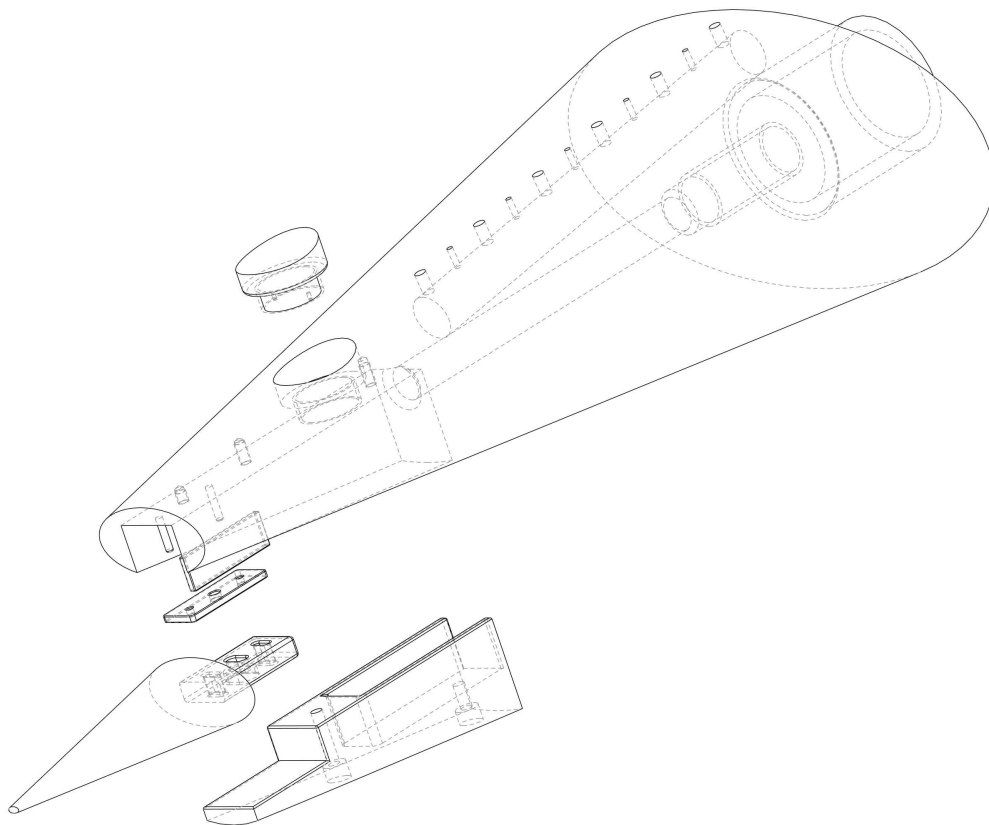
Exploded assembly drawing of HIFiRE-5 model
